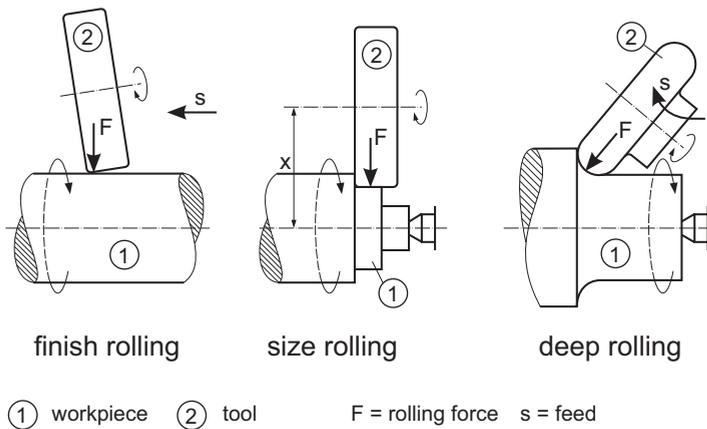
Methods of surface rolling: smooth rolling and deep rolling using the feed method (a), size rolling (b) and deep rolling using the plunge method (c) [2.56]
